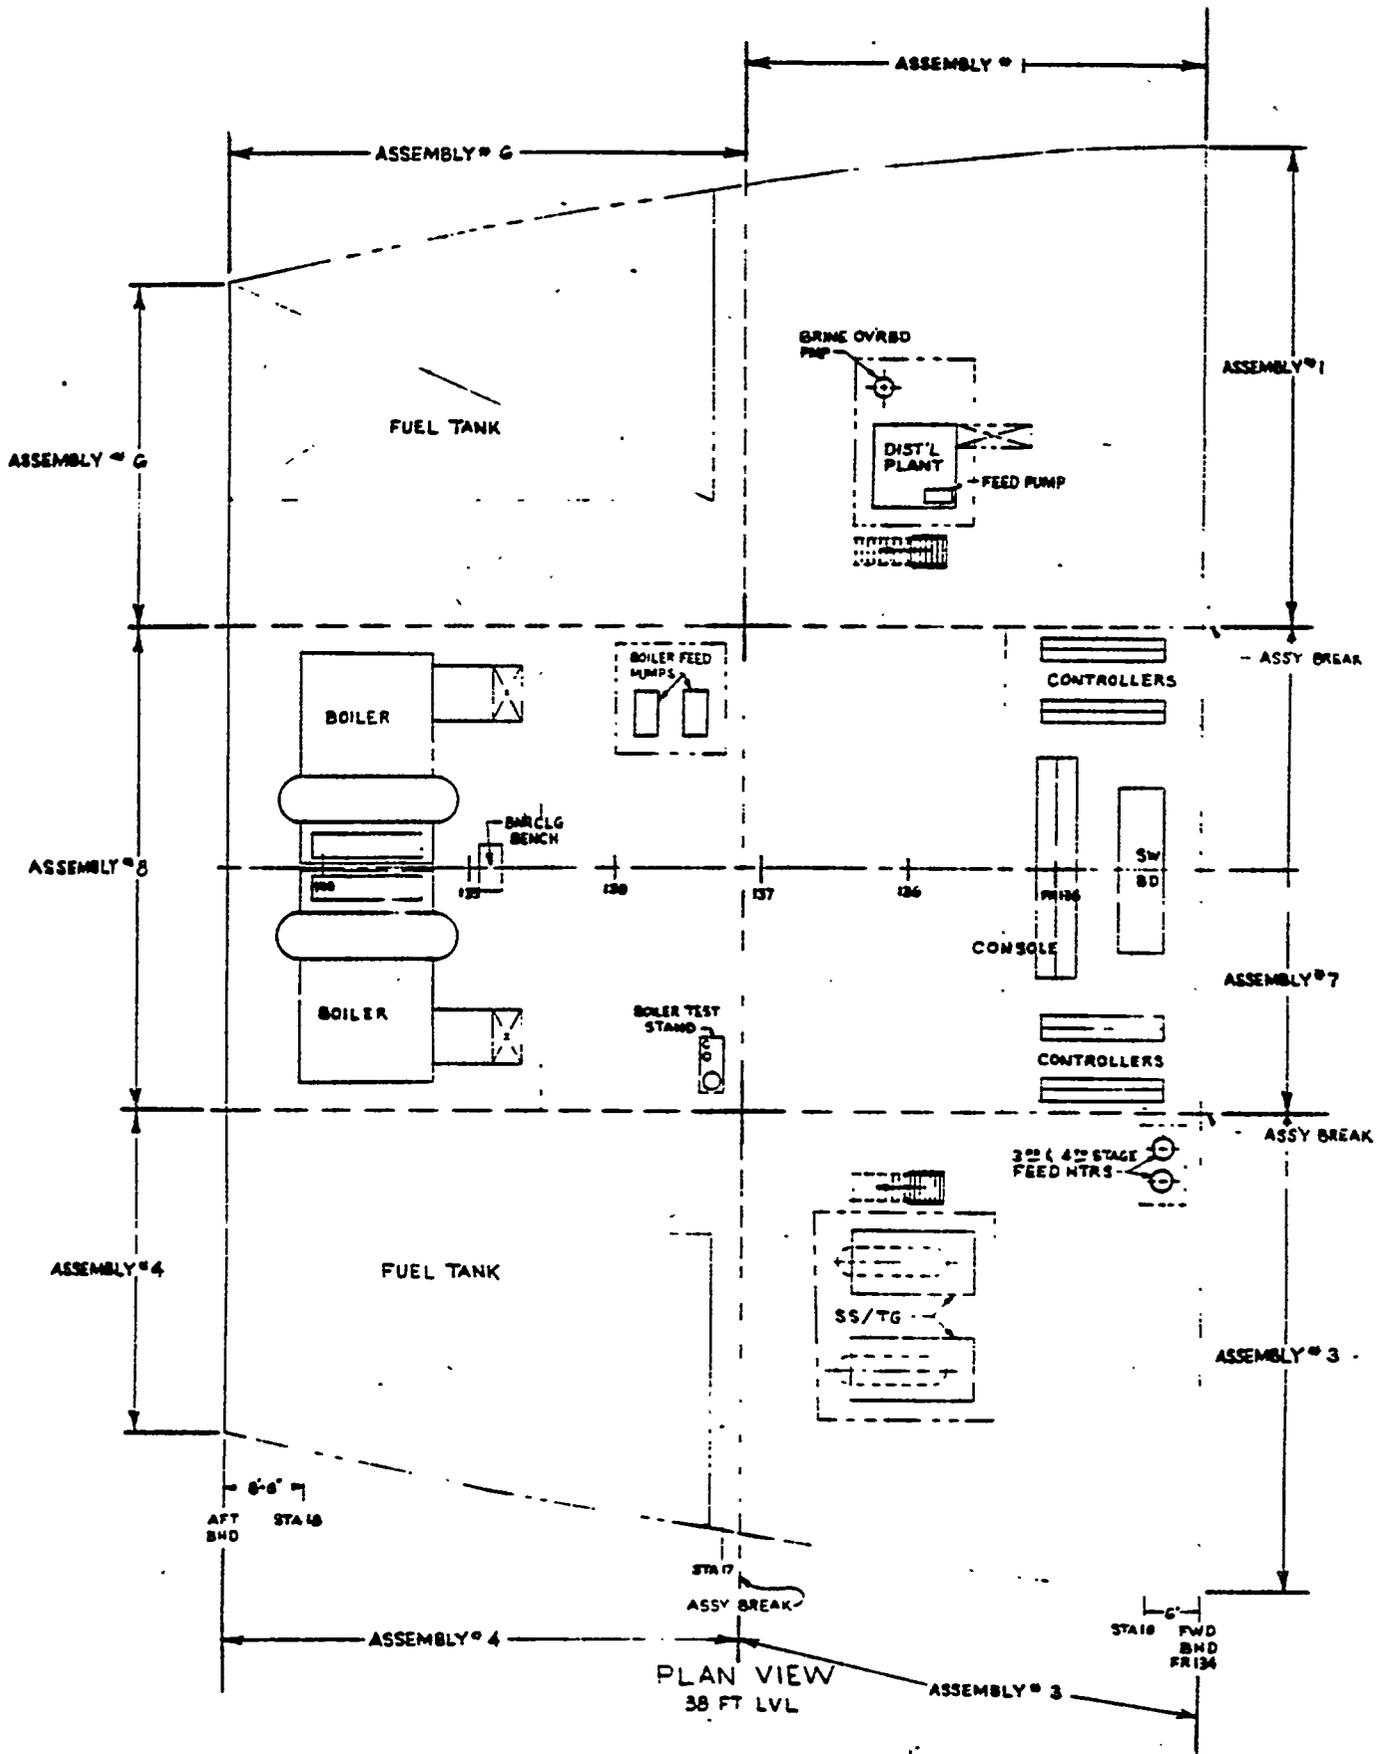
Steam Turbine Arrangement (Sheet 4 of 6)
